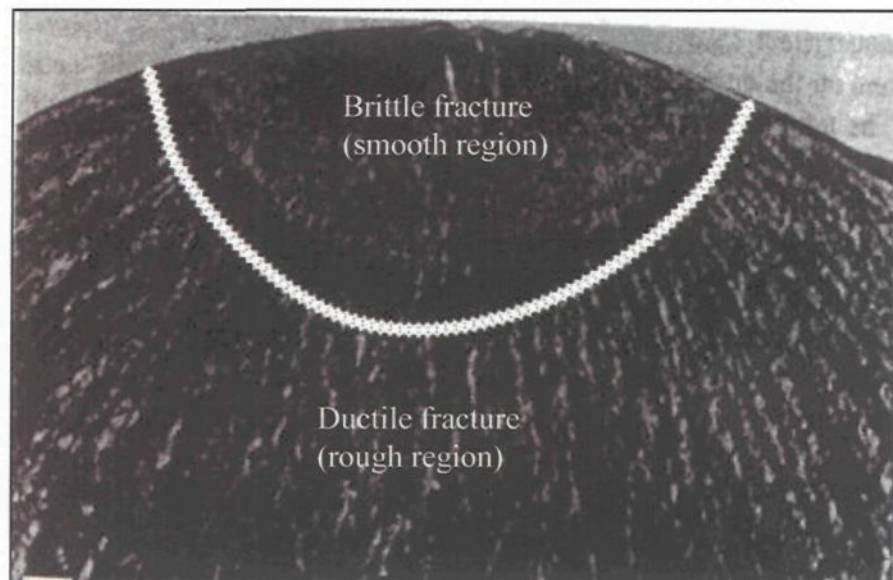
Fatigue fracture surface of a torsion shaft.⁴⁵
